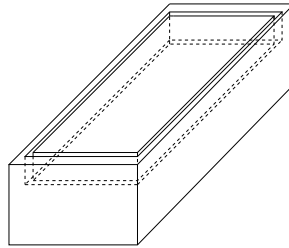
Endcap used to thermally seal the end of a Matraplast panel. A 1-mm thick groove is machined on the endcap and follows the exact shape of the Matraplast panel that will be inserted.
